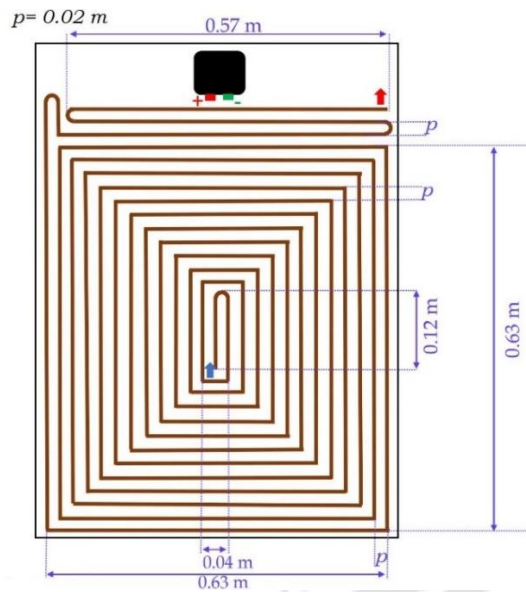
Dimensions of rectangular spiral tube assembly (M3)
